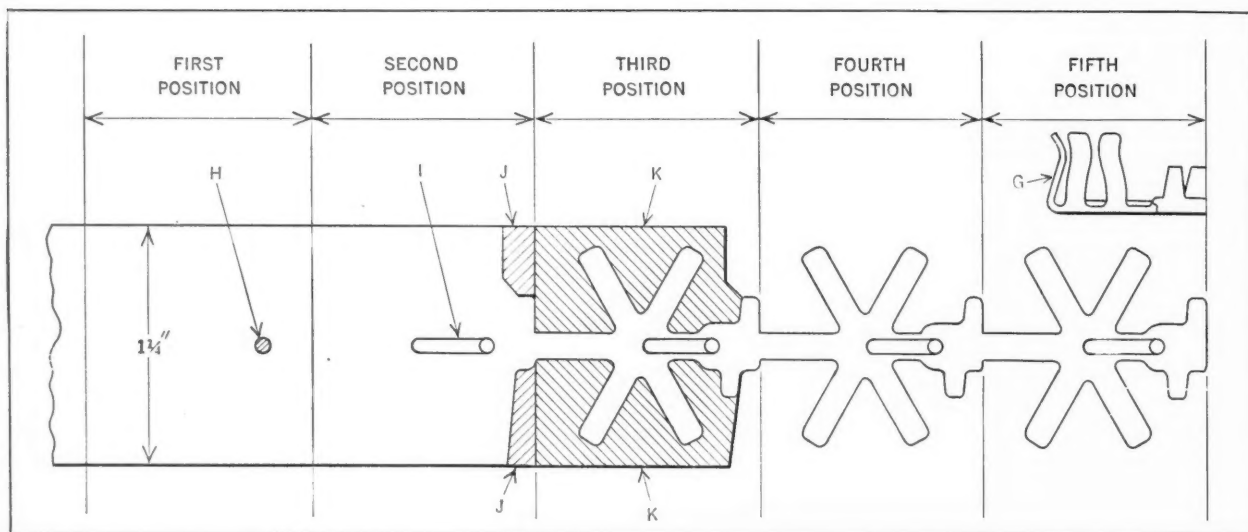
Diagram Showing Operations Performed in Each Position through which Stock Passes During the Production of Part D, Fig. 1
